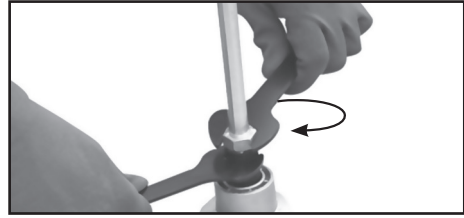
LOCKING THE ROD ON THE SHAFT
